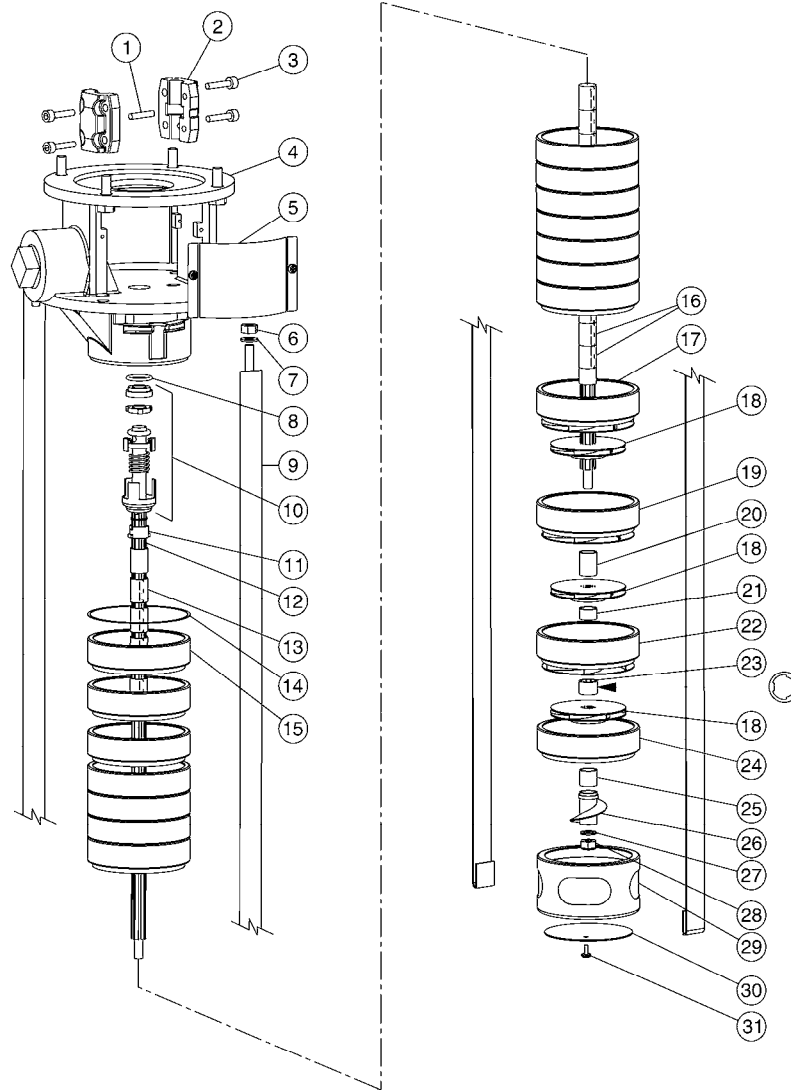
Exploded view of the Multi-Stage Vertical Centrifugal Pump.
